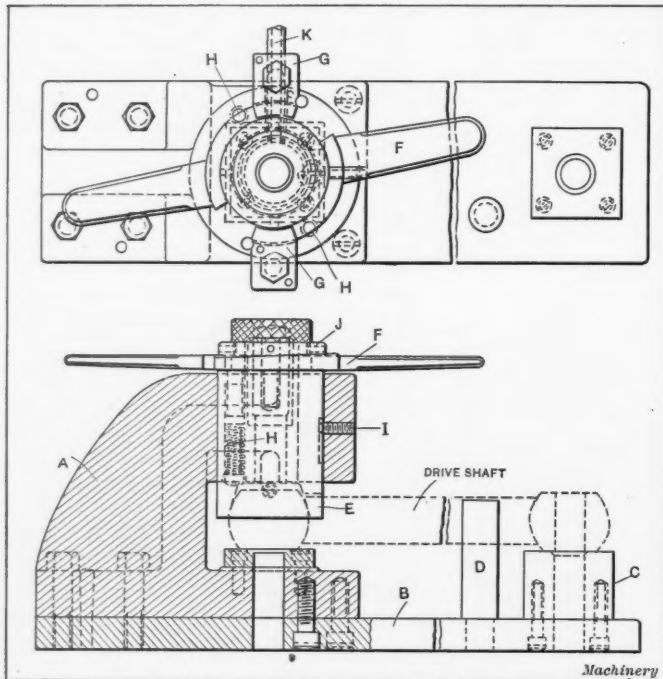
Drilling and Reaming Jig for Drive Shaft
